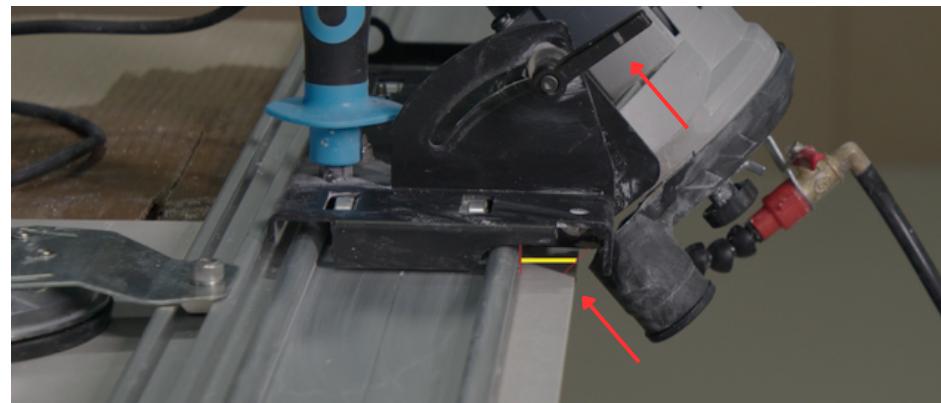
Tool on the rail and adjustment of the cutting angle with lever.
